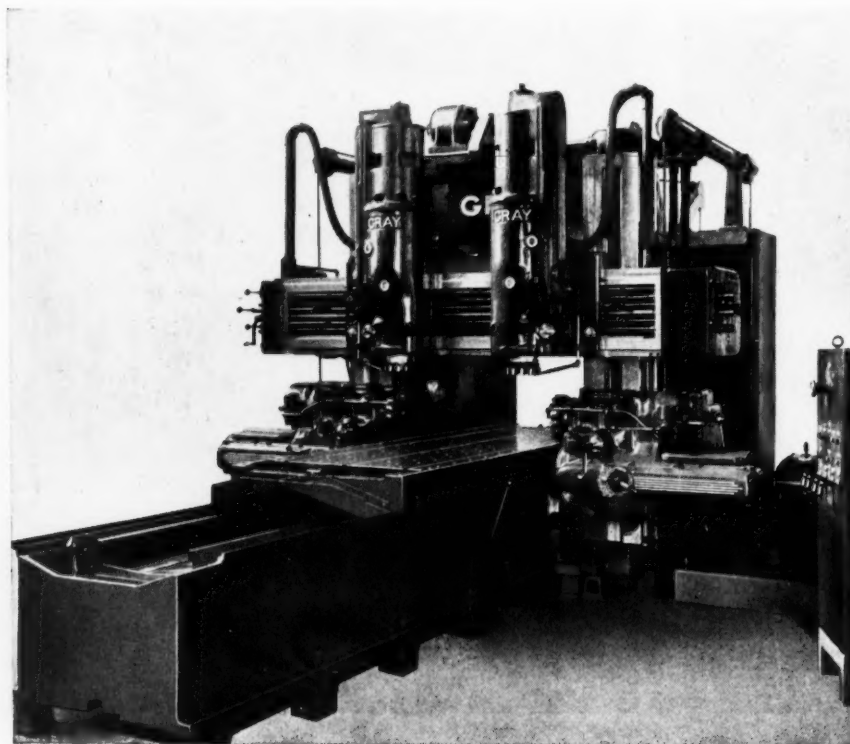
Gray Milling Machine Equipped with Four Unit Type Milling Heads
